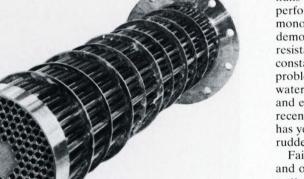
90/10 Cupronickel plug weld clad sea tube and 70/30 fusion weld clad tube plate
